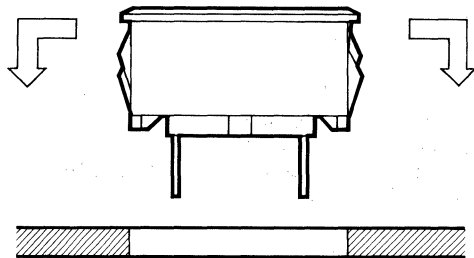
Installation of the Light Bar/Panel Mount Assembly into a Front Panel.
